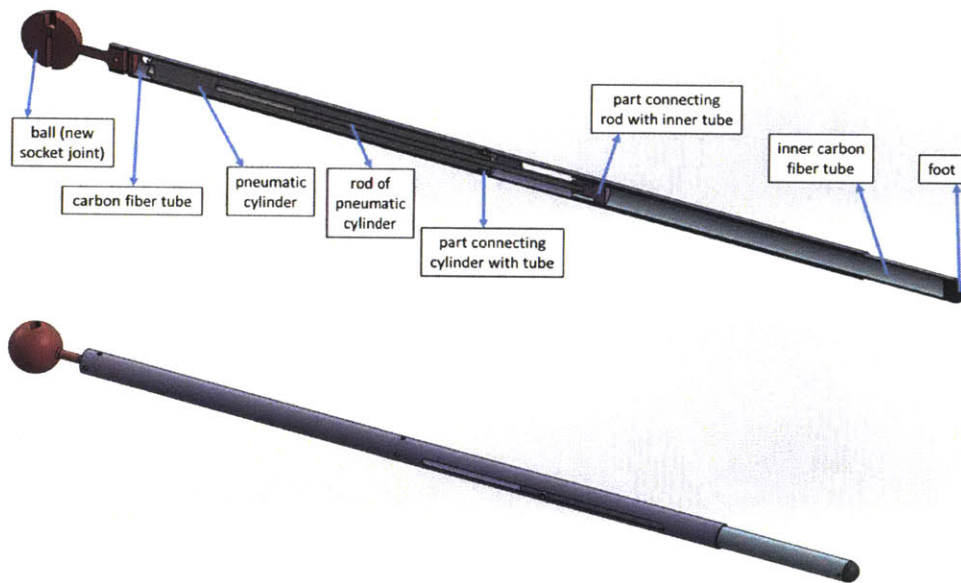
(Top) Cross-Section of the prismatic joint system. (Bottom) CAD model of the prismatic joint system, without the sensors or valves.
